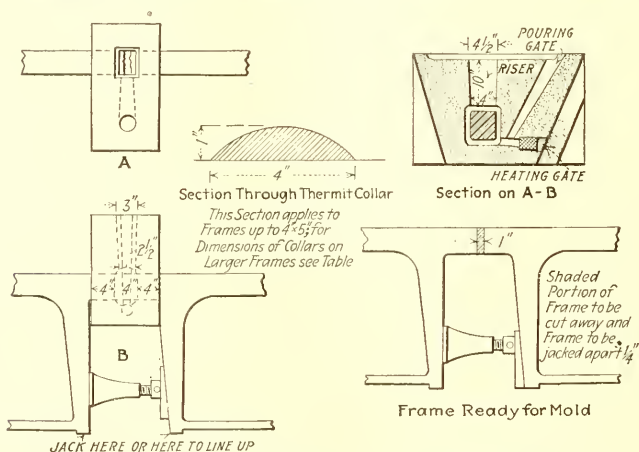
Method Employed in Welding Locomotive Frame Broken in Jaw.
